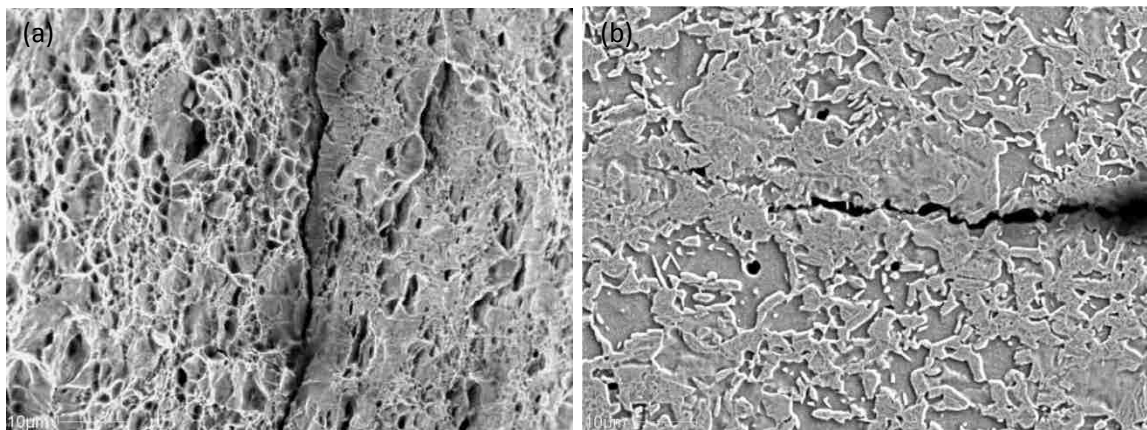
DP980 tube (a) fracture surface crack and (b) cross sectional view of crack path
